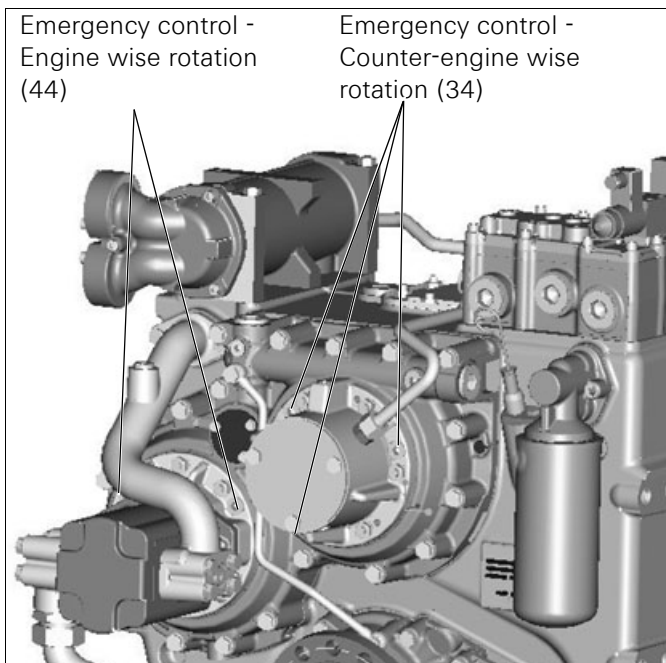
Position of clamping bolts for engine wise and counter-engine wise rotation (ZF 2000 A, example)
